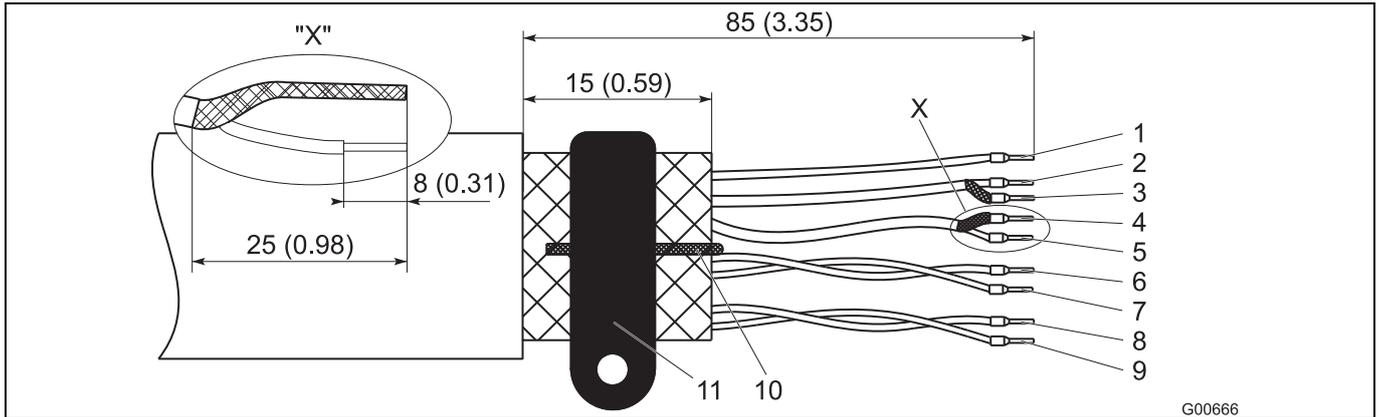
Flowmeter sensor side, dimensions in mm (inch)
